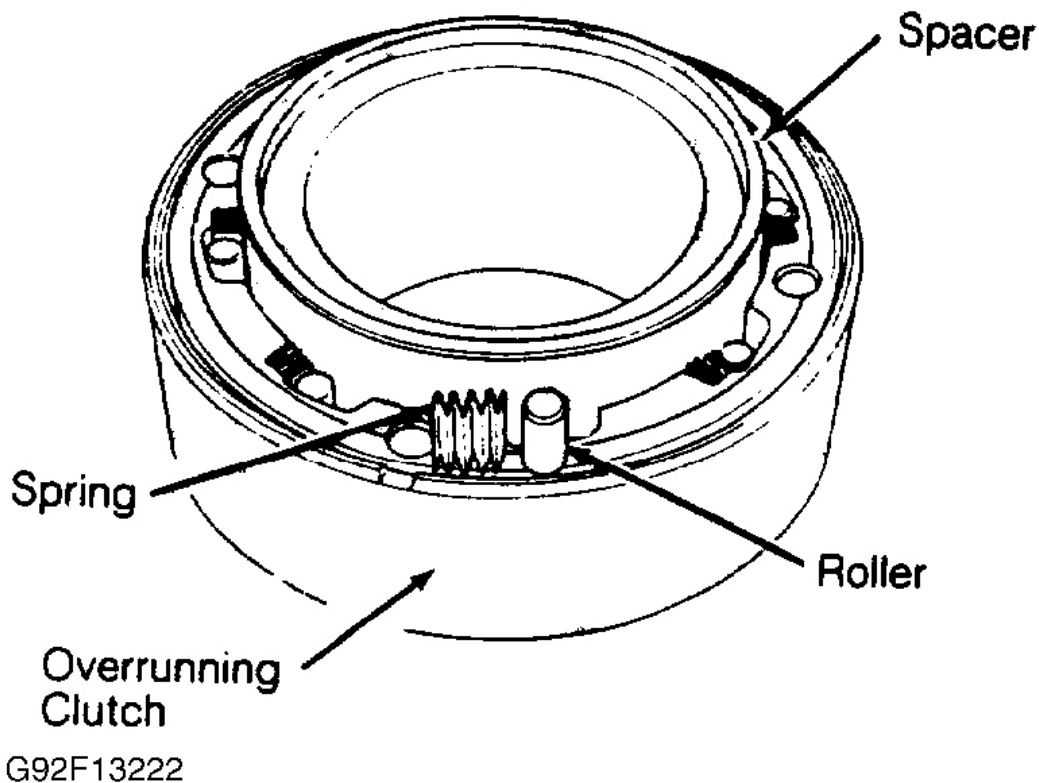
Installing Overrunning Clutch Rollers & Springs
